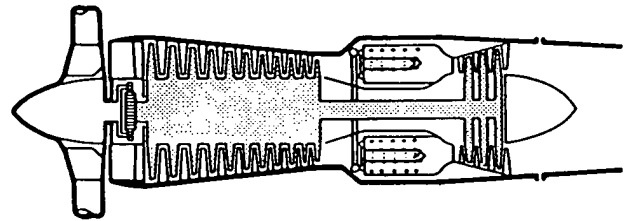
Turboprop with Propeller Driven Directly from the Compressor Shaft through Reduction Gears
